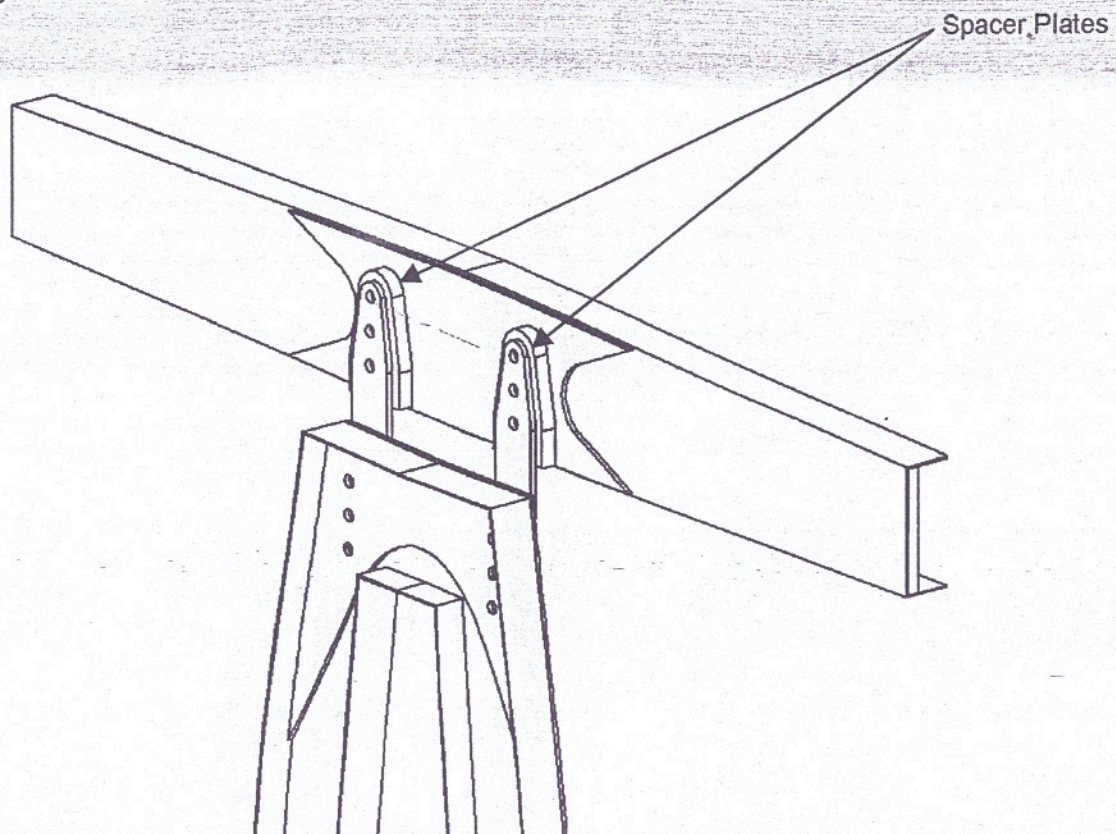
Adjust the spacer plates to allow alignment of attach fittings with the aft face of the lower banjo bulkhead
